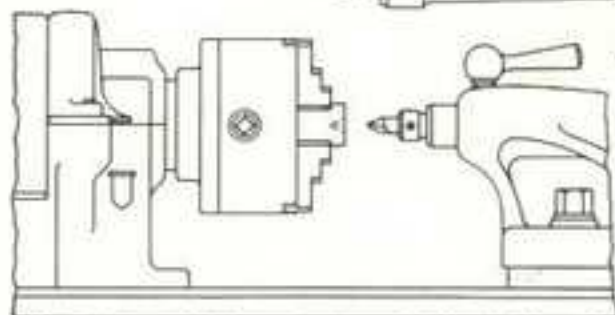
Using Center Drill Holder in Tailstock to Drill Accurate Center Hole in Piece Held in Chuck
